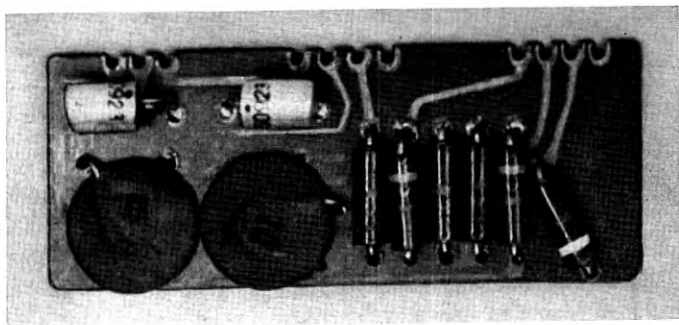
(b) — Scanner plate of the line unit shown in Fig. 7 (a).
